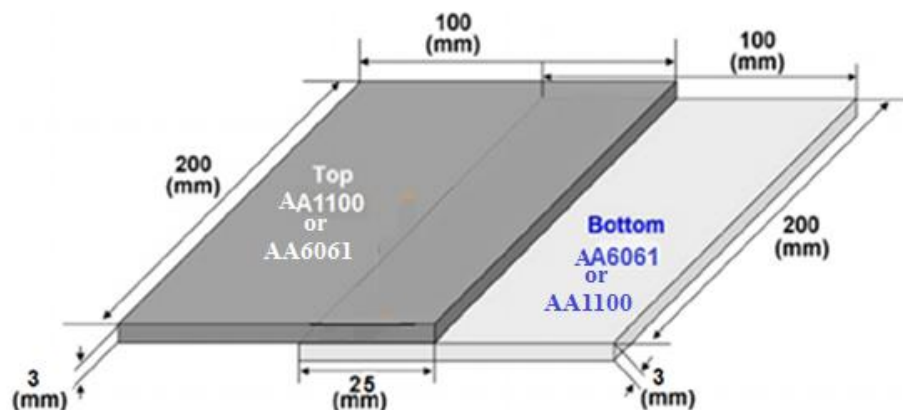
Plates dimensions to be Lap joined, all dimensions in mm
